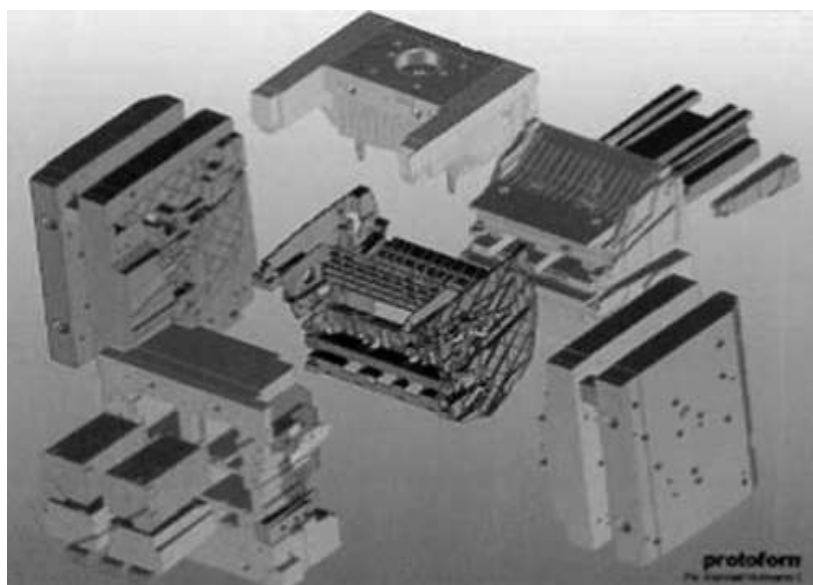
Space Puzzle Molding, where molds are constructed in segments for fast and easy fabrication and assembly
